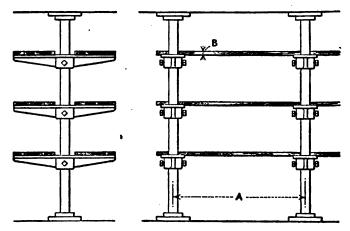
RACK OF BAR AND BRACKET CONSTRUCTION PLANK SHELVES
